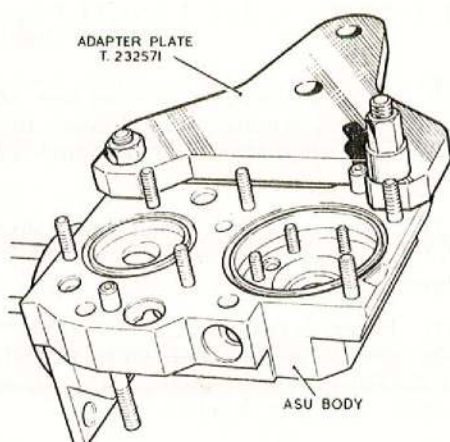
Adapter for mounting a.s.u. body on hydraulic fixture
